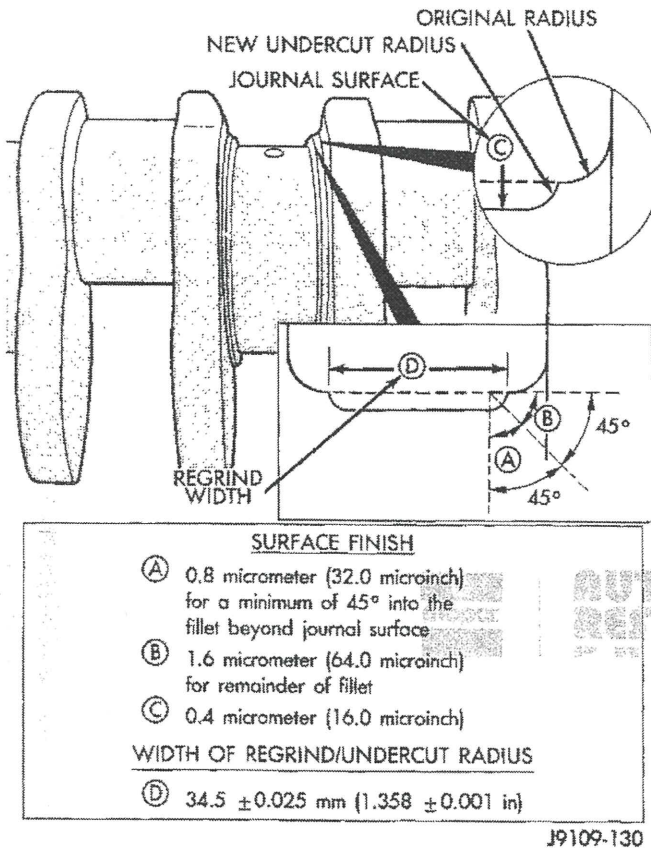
Grind Crankshaft Main Journal—Alternative Method
